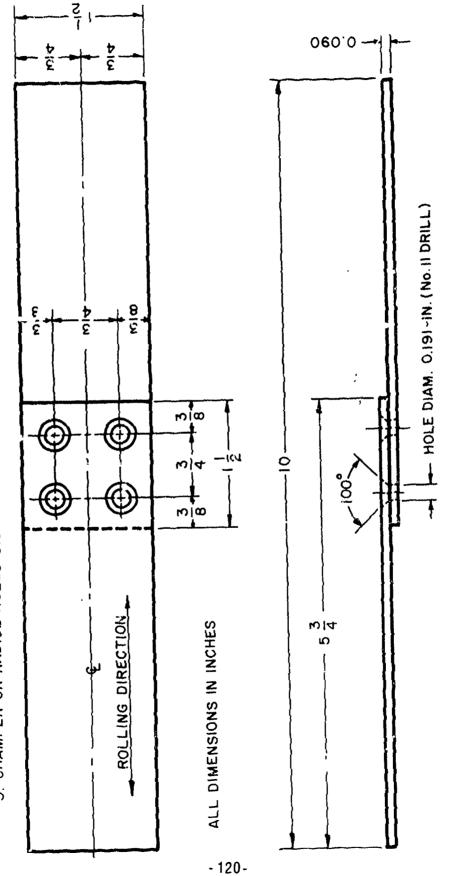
Shear Joint Fatigue Specimen for 3/16-in. Dia 100° Flat Countersunk Head Rivets
